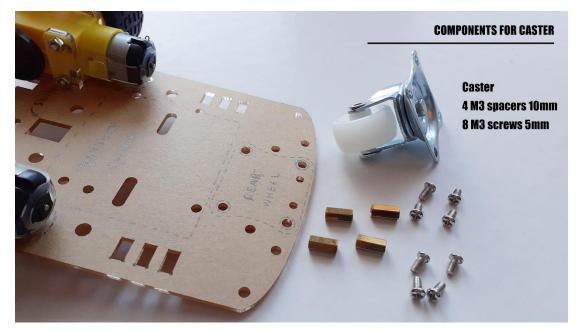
The component you need in order to assemble and attach the caster to the chassis.
